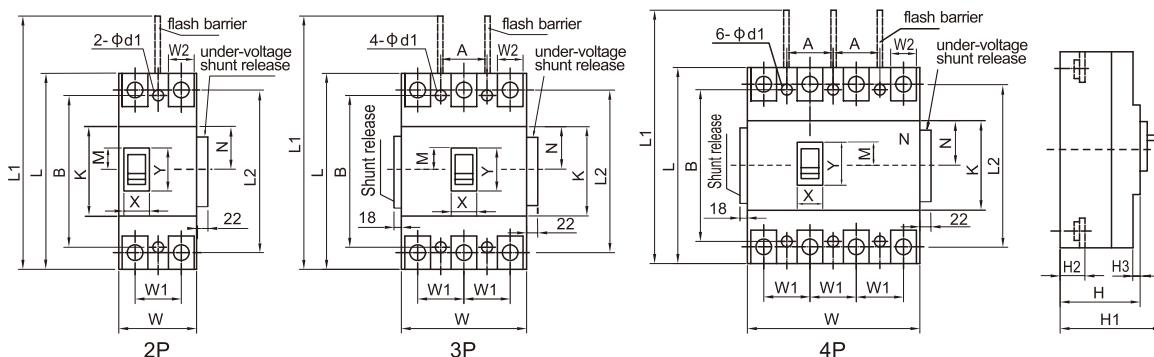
RDM1-80~800 Front wiring overall and installation dimension
